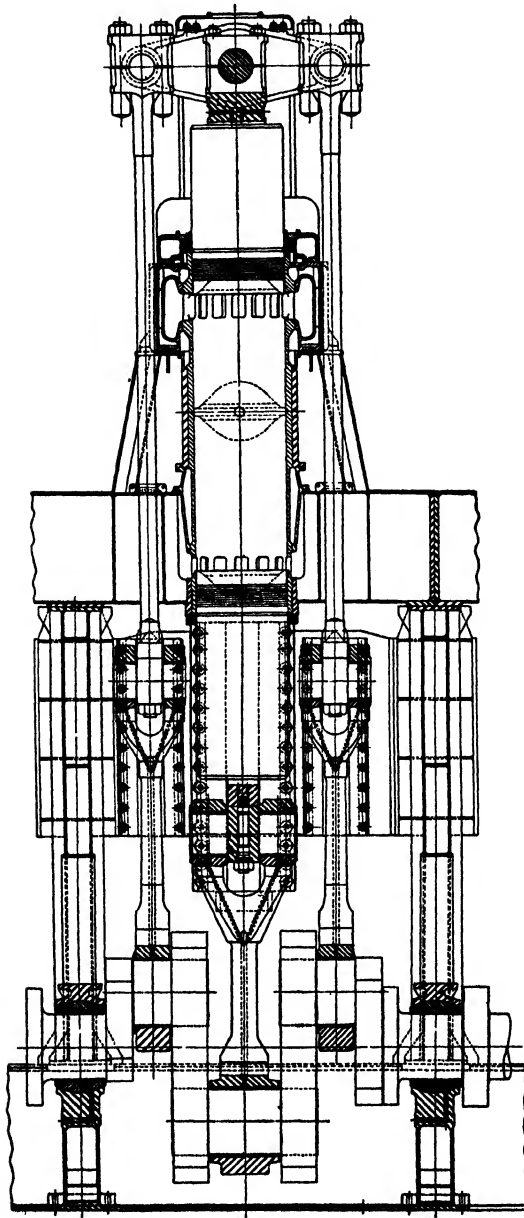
Longitudinal elevation through cylinder of Sun Duxford opposed-piston engine.
